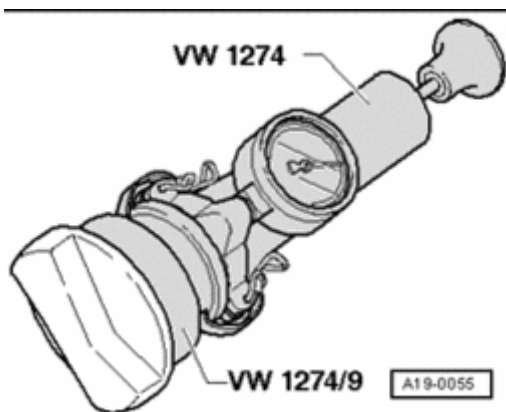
Attaching Cooling System Tester V.A.G 1274 With Adapter V.A.G 1274/9 To Cap
